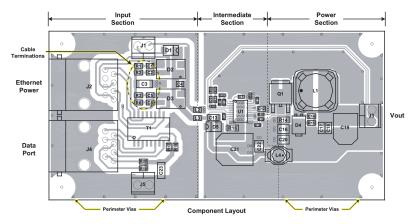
TPS23750 Non-Isolated Buck Converter Circuit Board Component Layout
